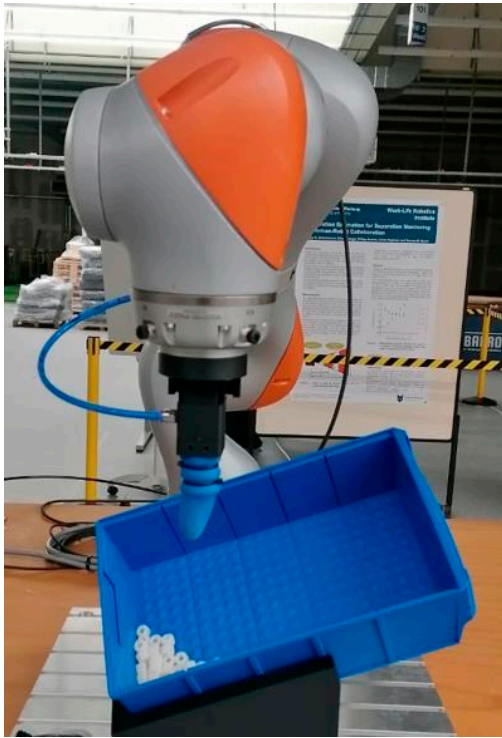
Kuka iiwa LBR 7 R800 robot with a powder filled gripper
